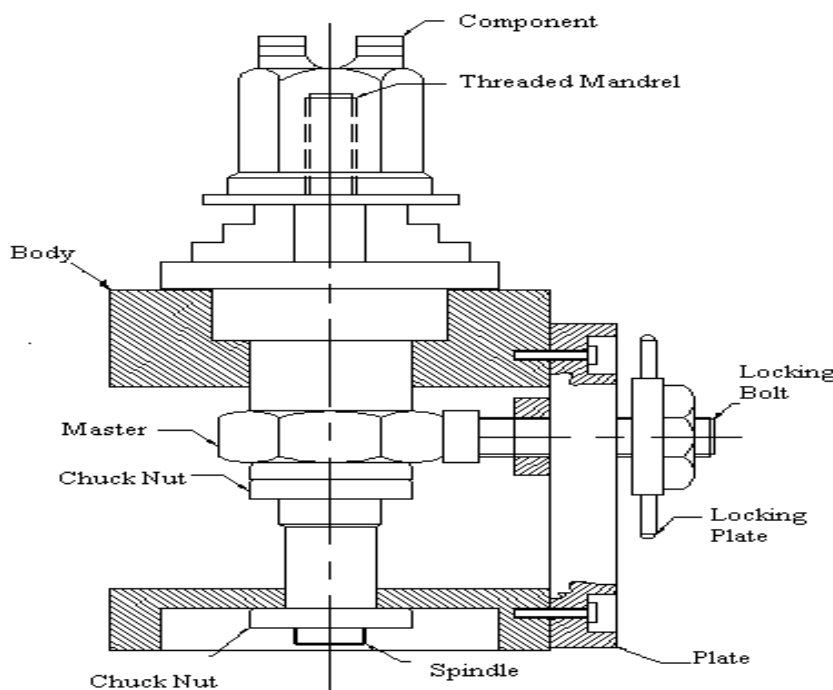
Existing Assembly of Indexing Fixture with Component
